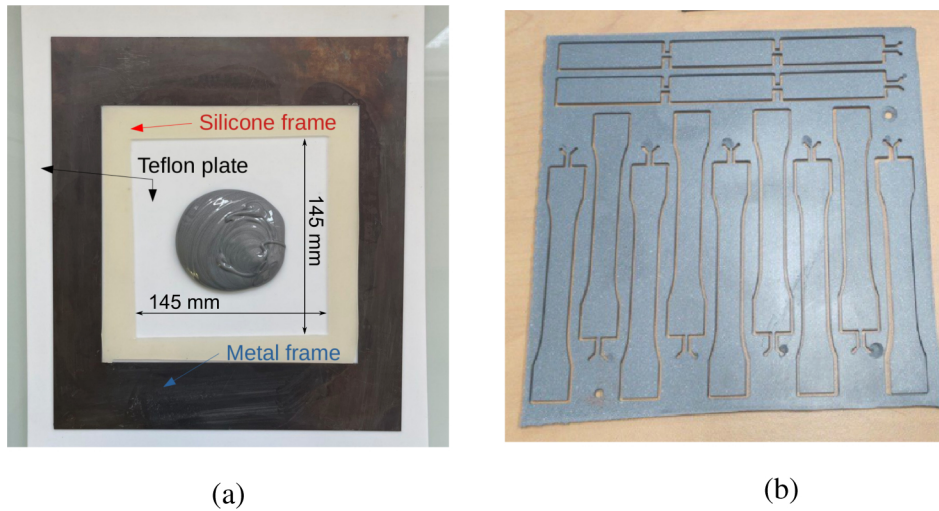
Adhesive plate fabrication according to NF T 76-142: (a) pouring of the adhesive, (b) machined specimens.
